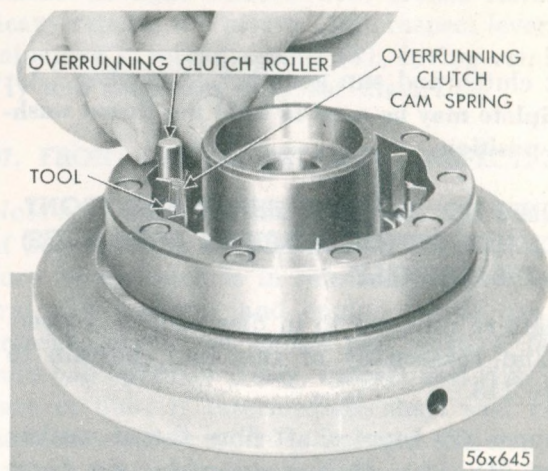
Installation of Overrunning Clutch Rollers and Springs in Intermediate Support and Cam Assembly
